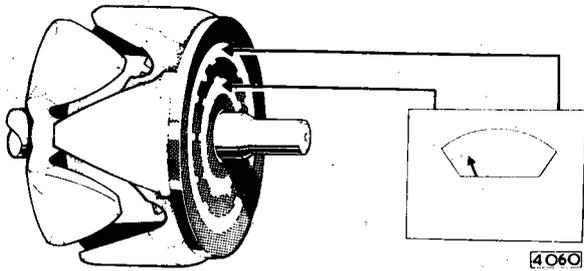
Measuring the rotor winding resistance with an ohmmeter
